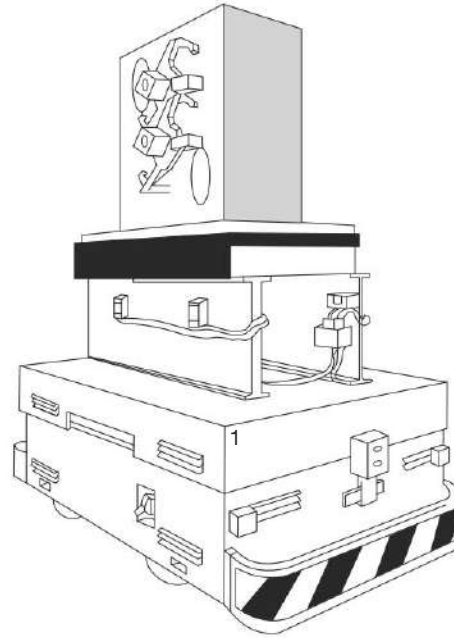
The Automated Guided Vehicle System (AGVS) with a workpiece pallet
